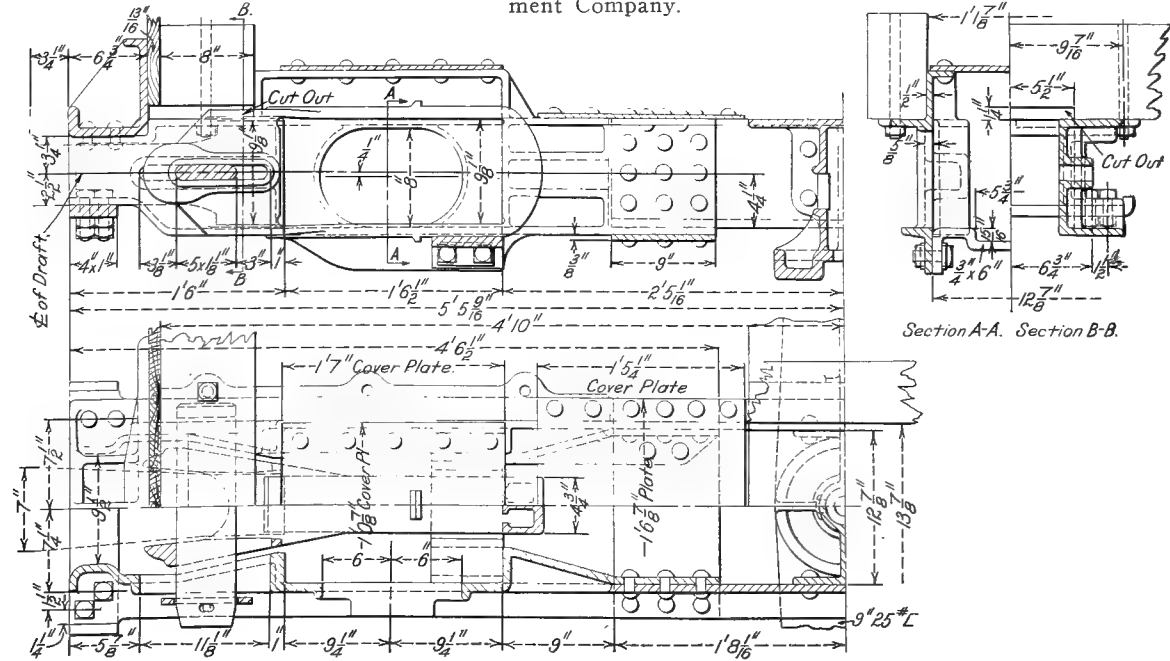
Universal Attachments and Keyed Yoke with Cast Steel Draft Arms, for Cardwell Friction Draft Gear, Type G. Universal Draft Gear Attachment Company.
